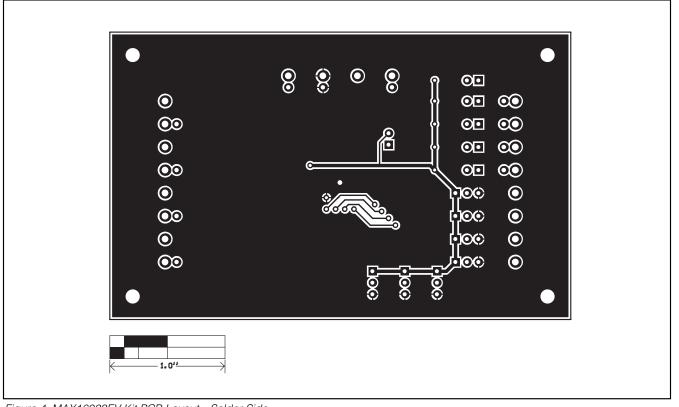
MAX16029EV Kit PCB Layout—Solder Side
